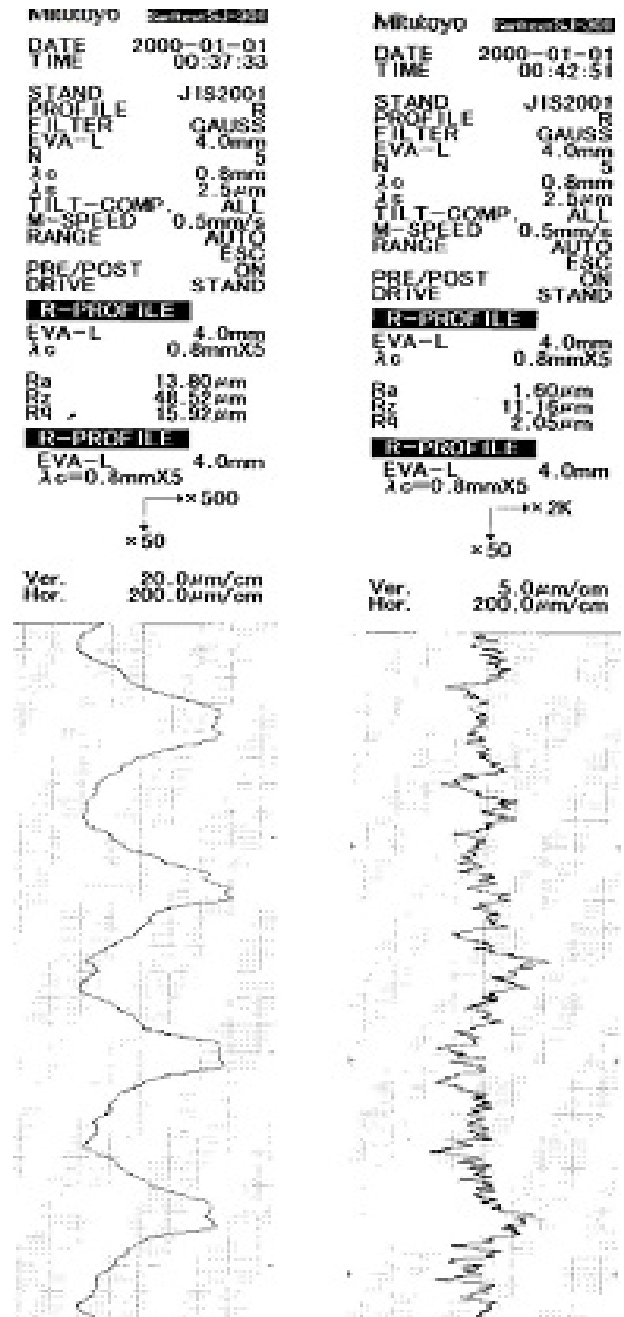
Record of the profile of machined surface with a classical tool with tip radius (left) and a tool with helical cutting edge (right)
